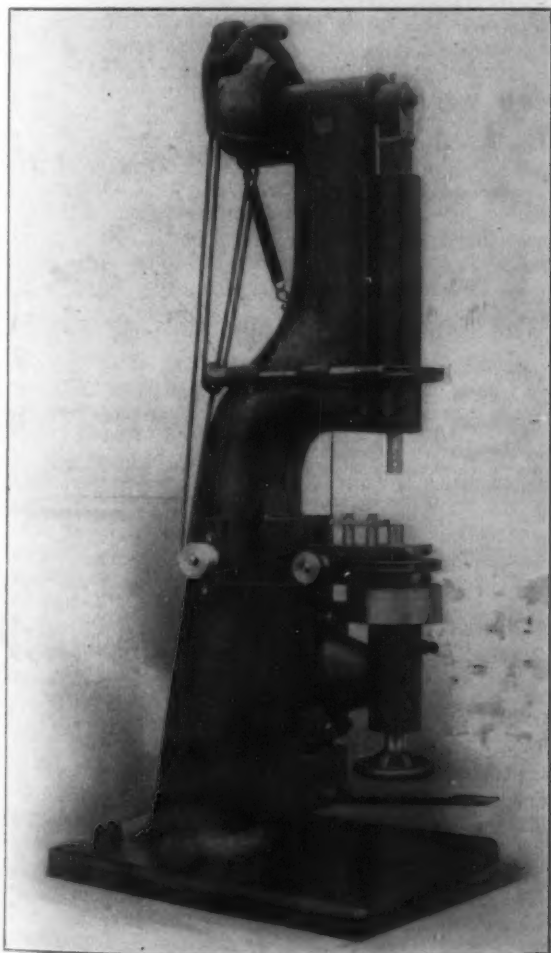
The New Elastic Blow Riveting Machine with Lower Revolving Fixture Built by the F. B. Shuster Company, New Haven, Conn.
